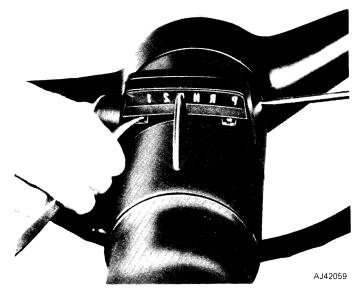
Shift Quadrant Retainer Clip Removal
